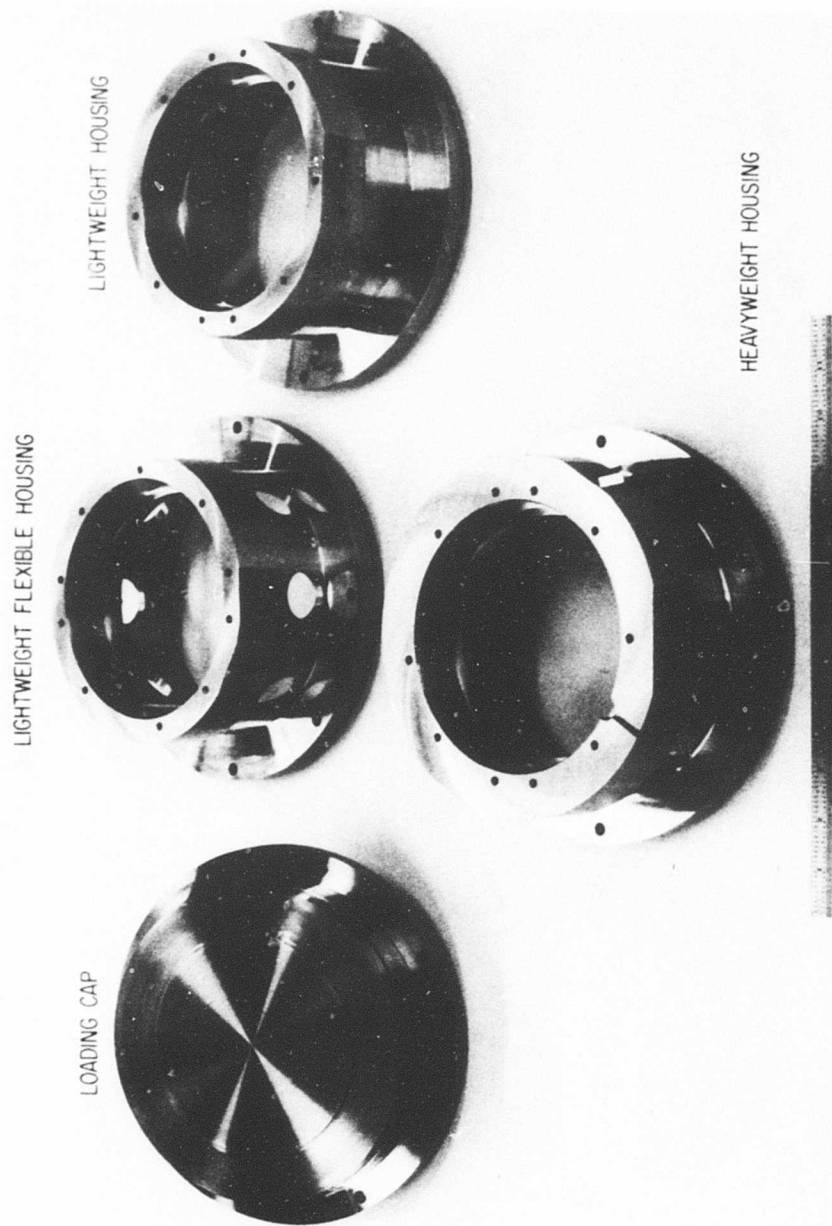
Bearing Housings for Bearing Number 1 and Loading Cap.
